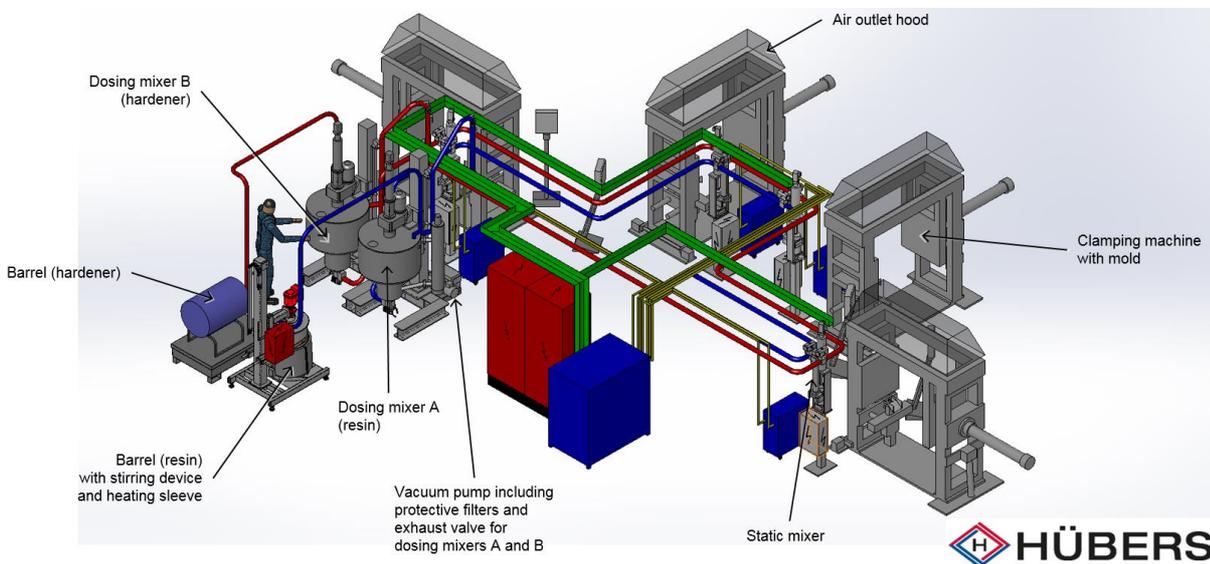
CAD rendering of an APG system with 4 Clamping Machines. Source: Hübers
